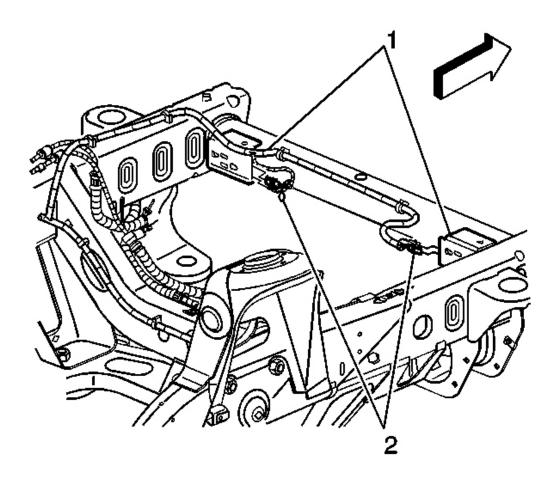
Removing/Installing Sensor Assembly Courtesy of GENERAL MOTORS CORP.
